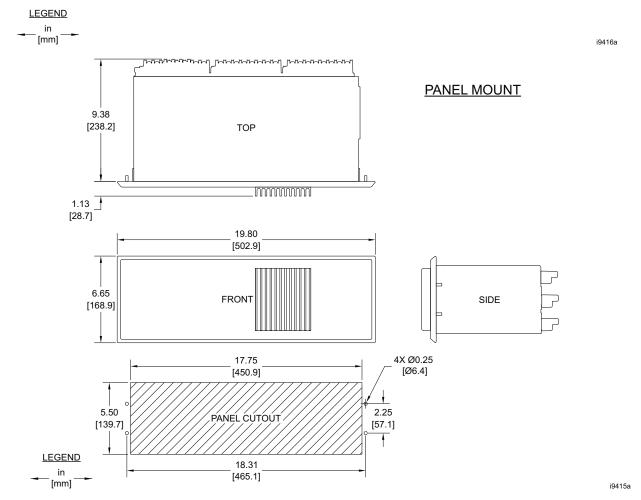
SEL-3350 Dimensions for 3U Rack- and Panel-Mount Model
